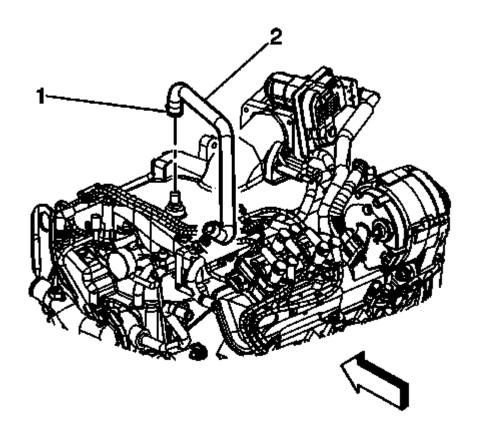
View Of Brake Booster Vacuum Hose Courtesy of GENERAL MOTORS COMPANY
